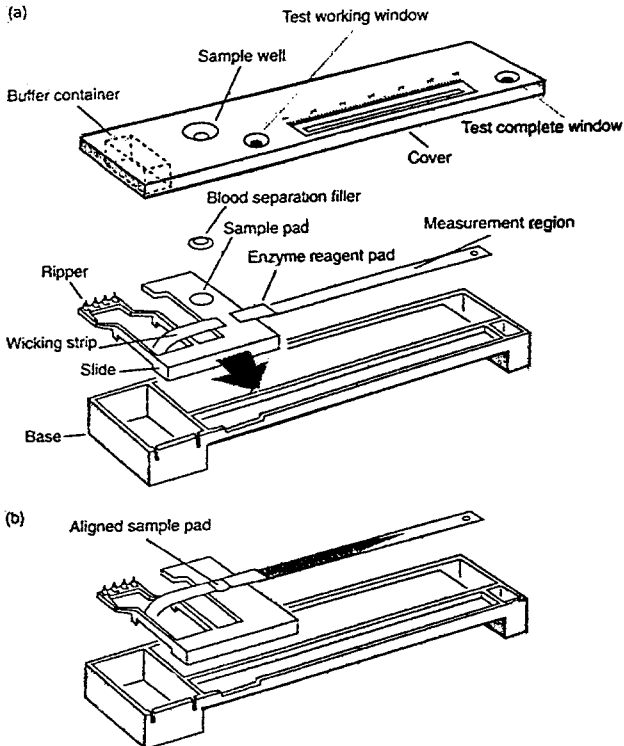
Exploded view of the AccuMeter home cholesterol test.
